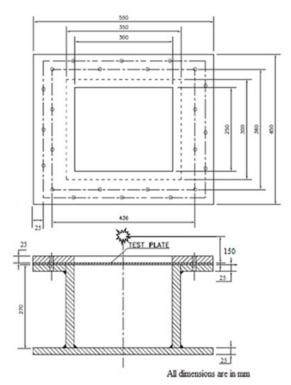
The experimental assembly of the underwater explosion test; the plan view of the assembly (above), the cross-sectional view of the assembly (below) [17]
